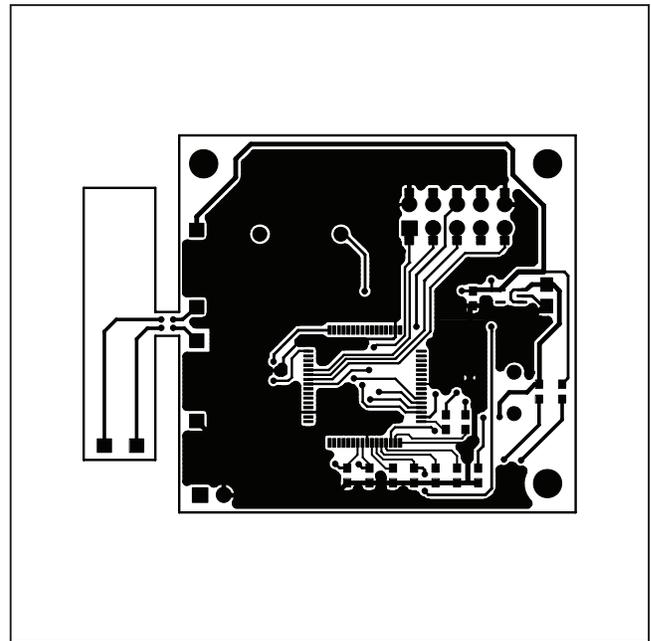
MAXADC-RTD PCB Layout—Solder Side
